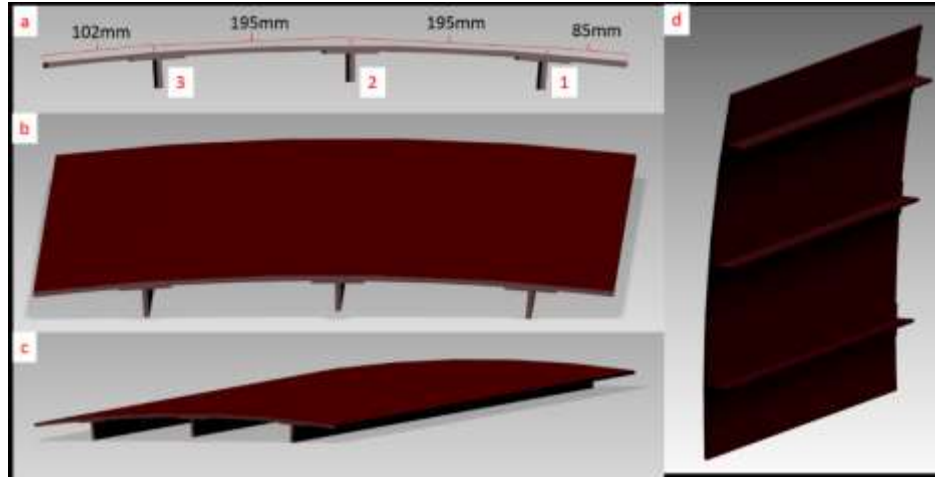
Stiffener Panel: (a) Side View -stiffener locations, (b) Side and Top View, (c) Oblique View and (d) Bottom View.
